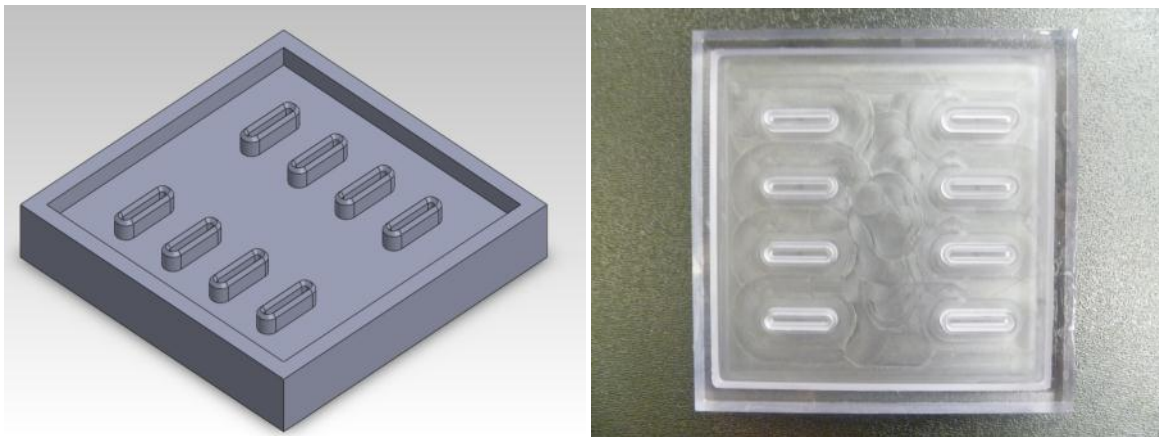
SolidWorks representation and image of actual oval-shaped mold
